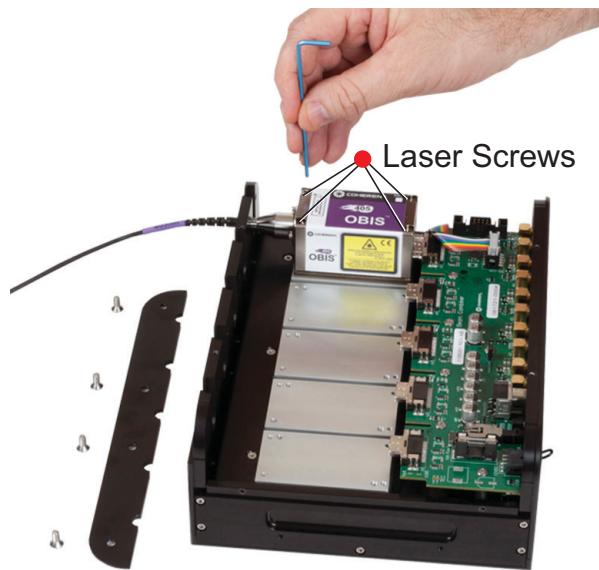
OBIS Laser Box: Attach the Laser to the Heatsink
